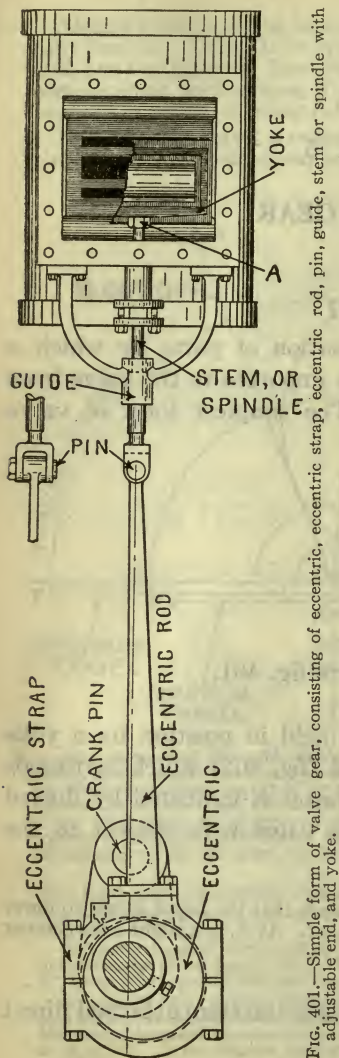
Simple form of valve gear, consisting of eccentric, eccentric strap, eccentric rod, pin, guide, stem or spindle with adjustable end, and yoke.
